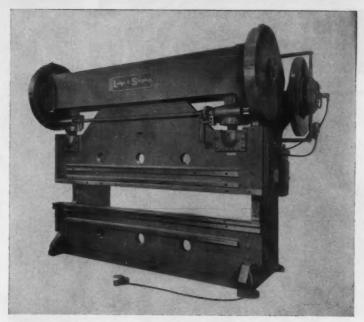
Power press brake will be shown by Hamilton Division of Lodge & Shipley Co.
